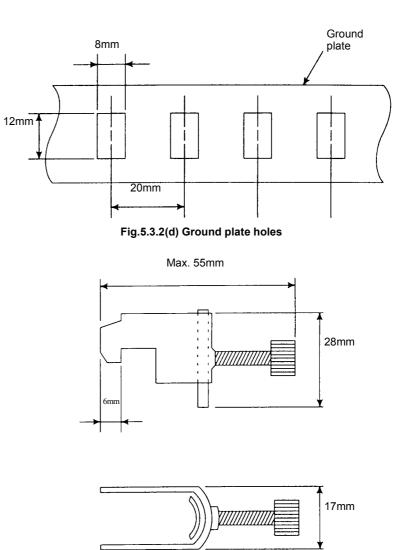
(e) Outer drawings of metal fittings for clamp
